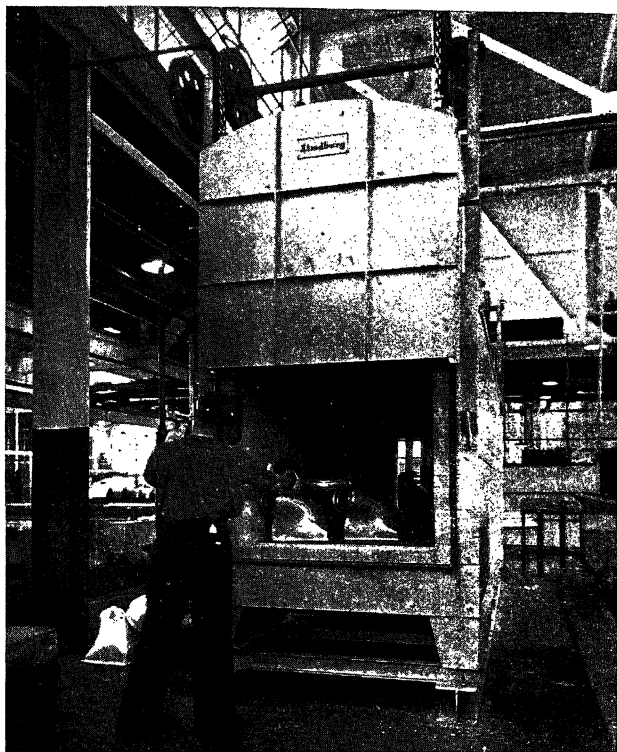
View 2.—Air-type heat-treating furnace with doors open.
